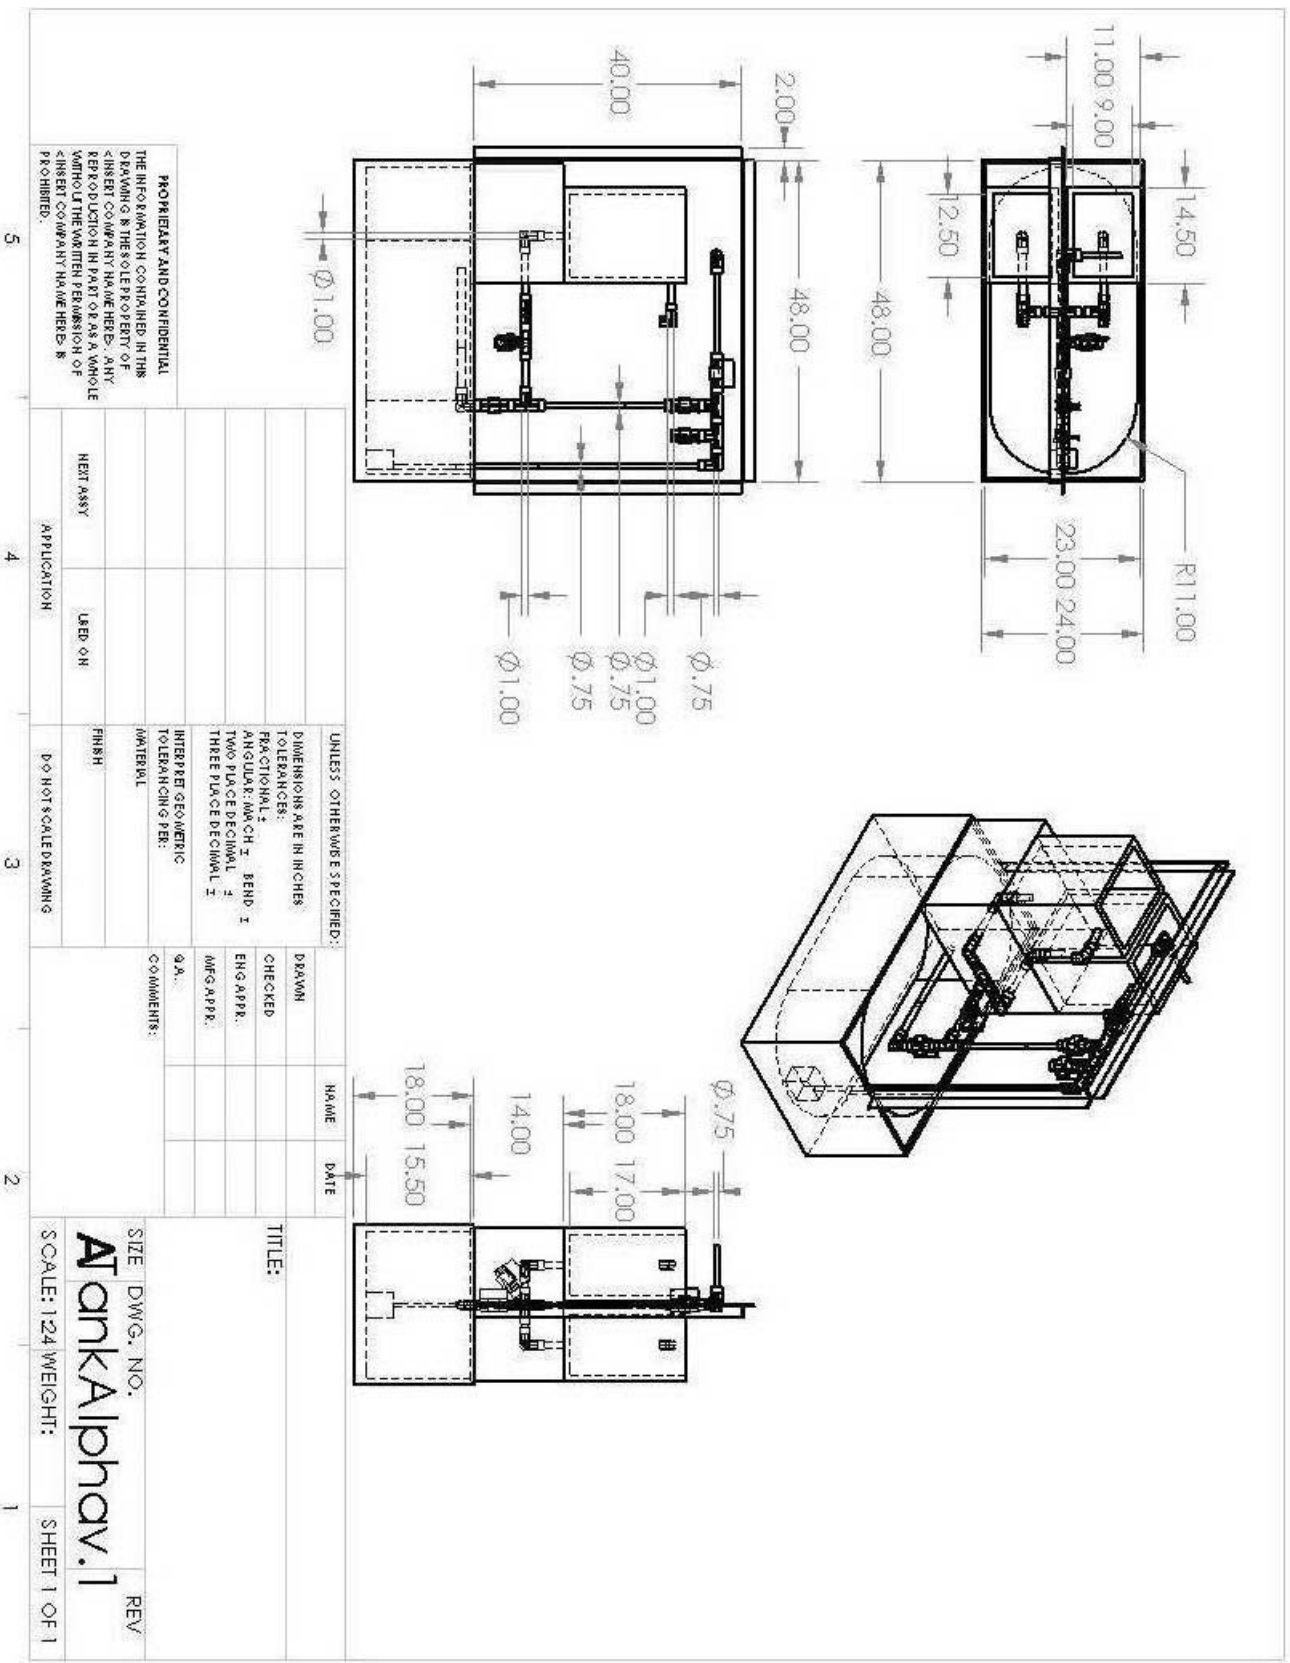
Dimensioned CAD drawing of the Alpha Design.
